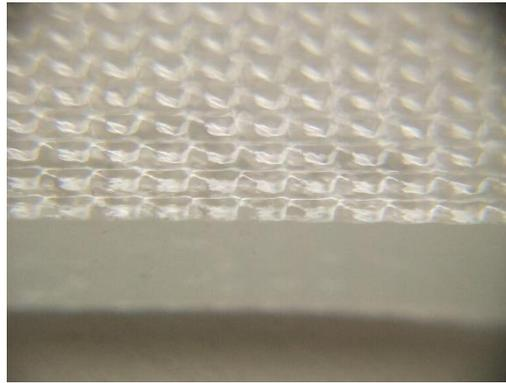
Microscope image of a cover plate with structured surface produced by imprint technique. Lateral dimension is ~ 1.5 mm.
